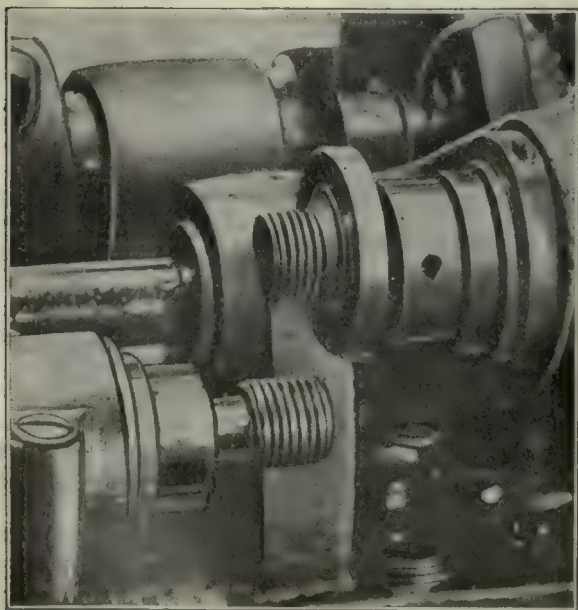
CLOSE-UP VIEW OF THREADING ROLLS IN A MACHINE OF THE TYPE SHOWN IN FIG. 3
